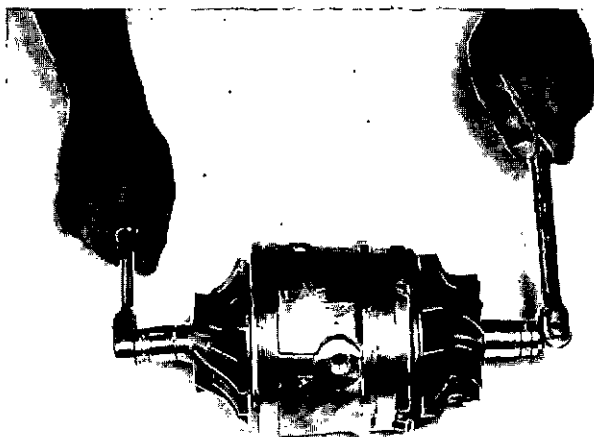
, (T465058). Remove the rotor nut from the rotor assembly
